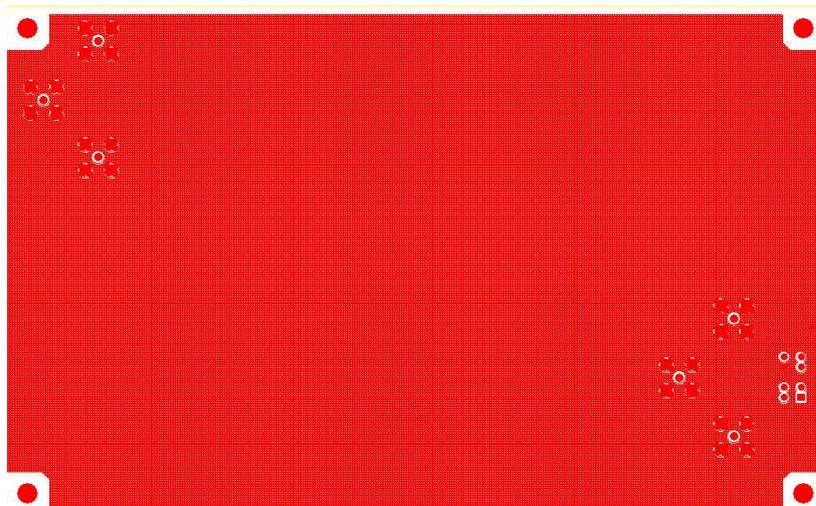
The Crosstalk Basics Bare Board (Bottom View)
